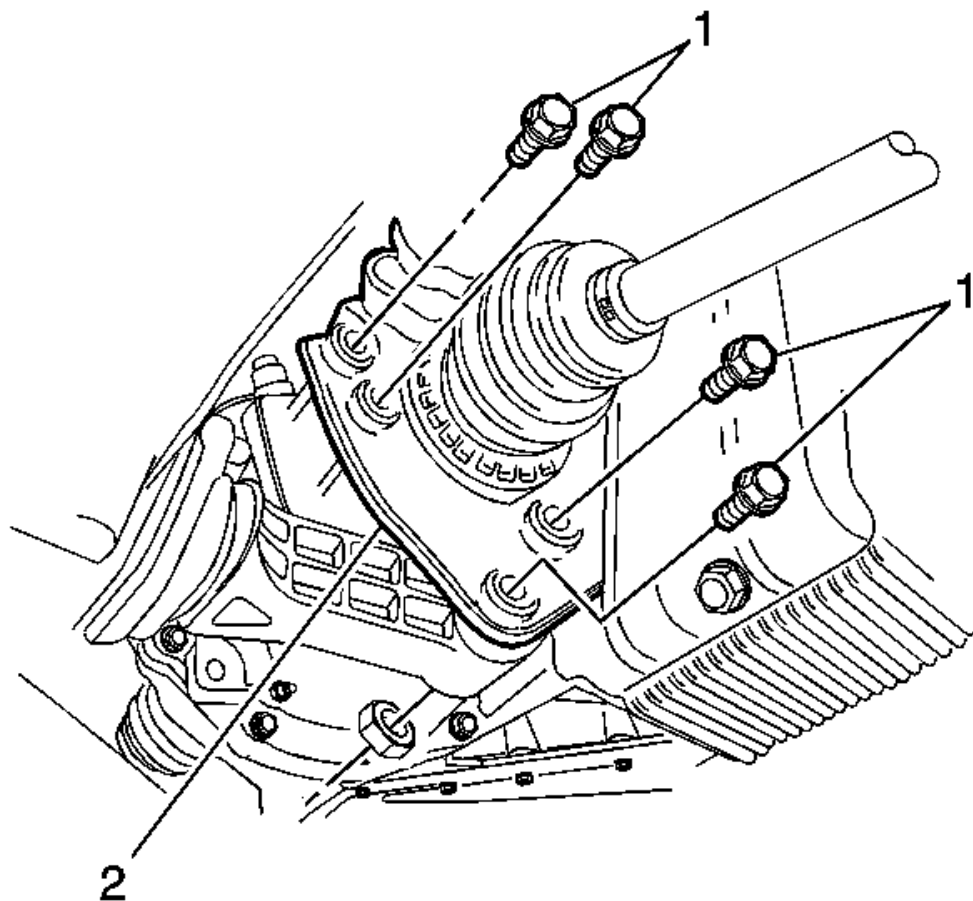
Transmission Rear Mounting Bracket (A/T)
